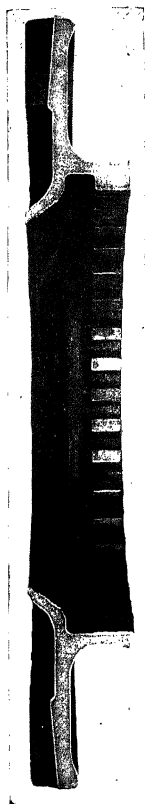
Macrostructure of Bramo Fafnir 323P driving gear wheel.
